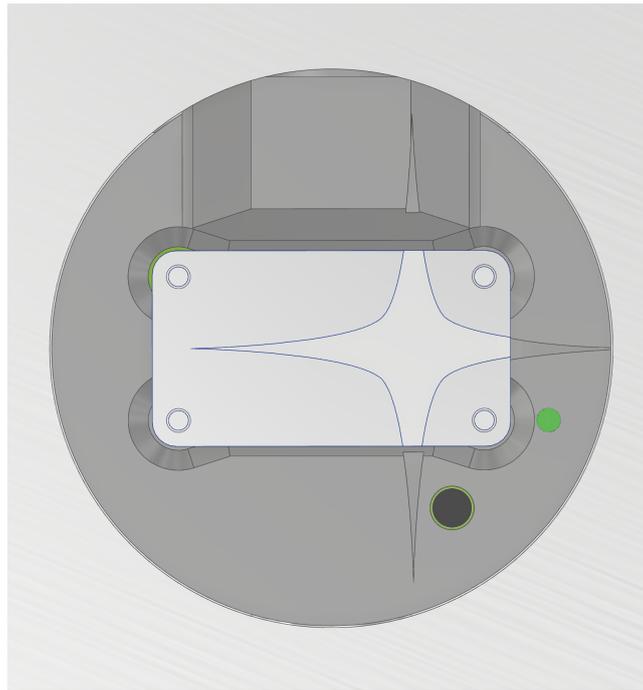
The engraved mark on the contact bridge aligns and forms a star with the internal cover of the vacuum chamber.
